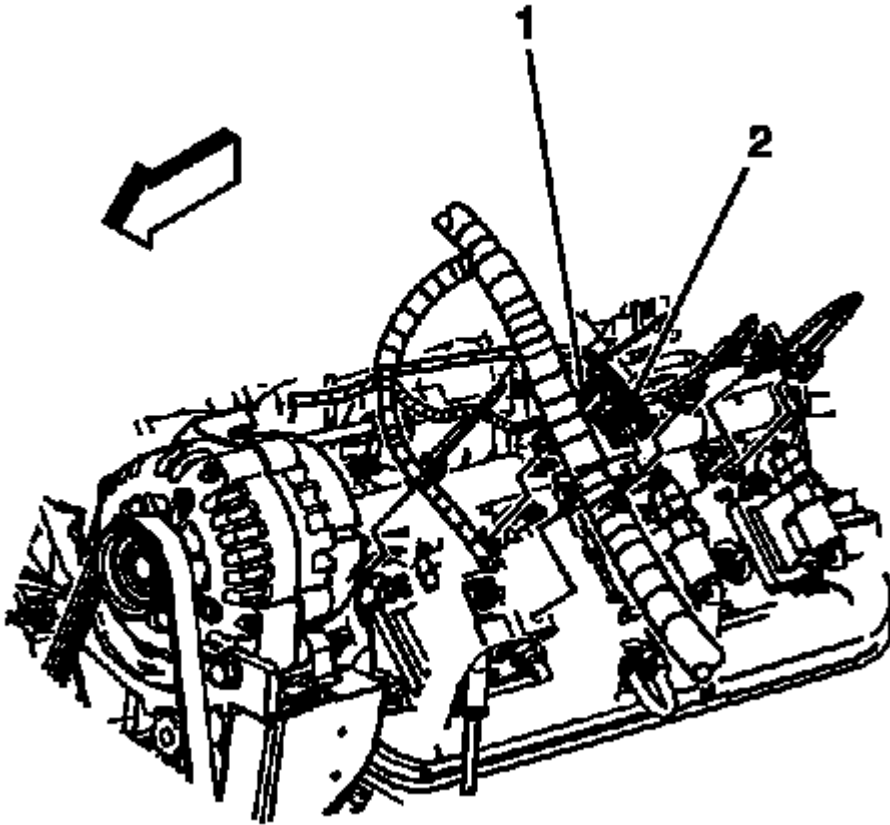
Identifying Oil Pressure Sensor & Washer
